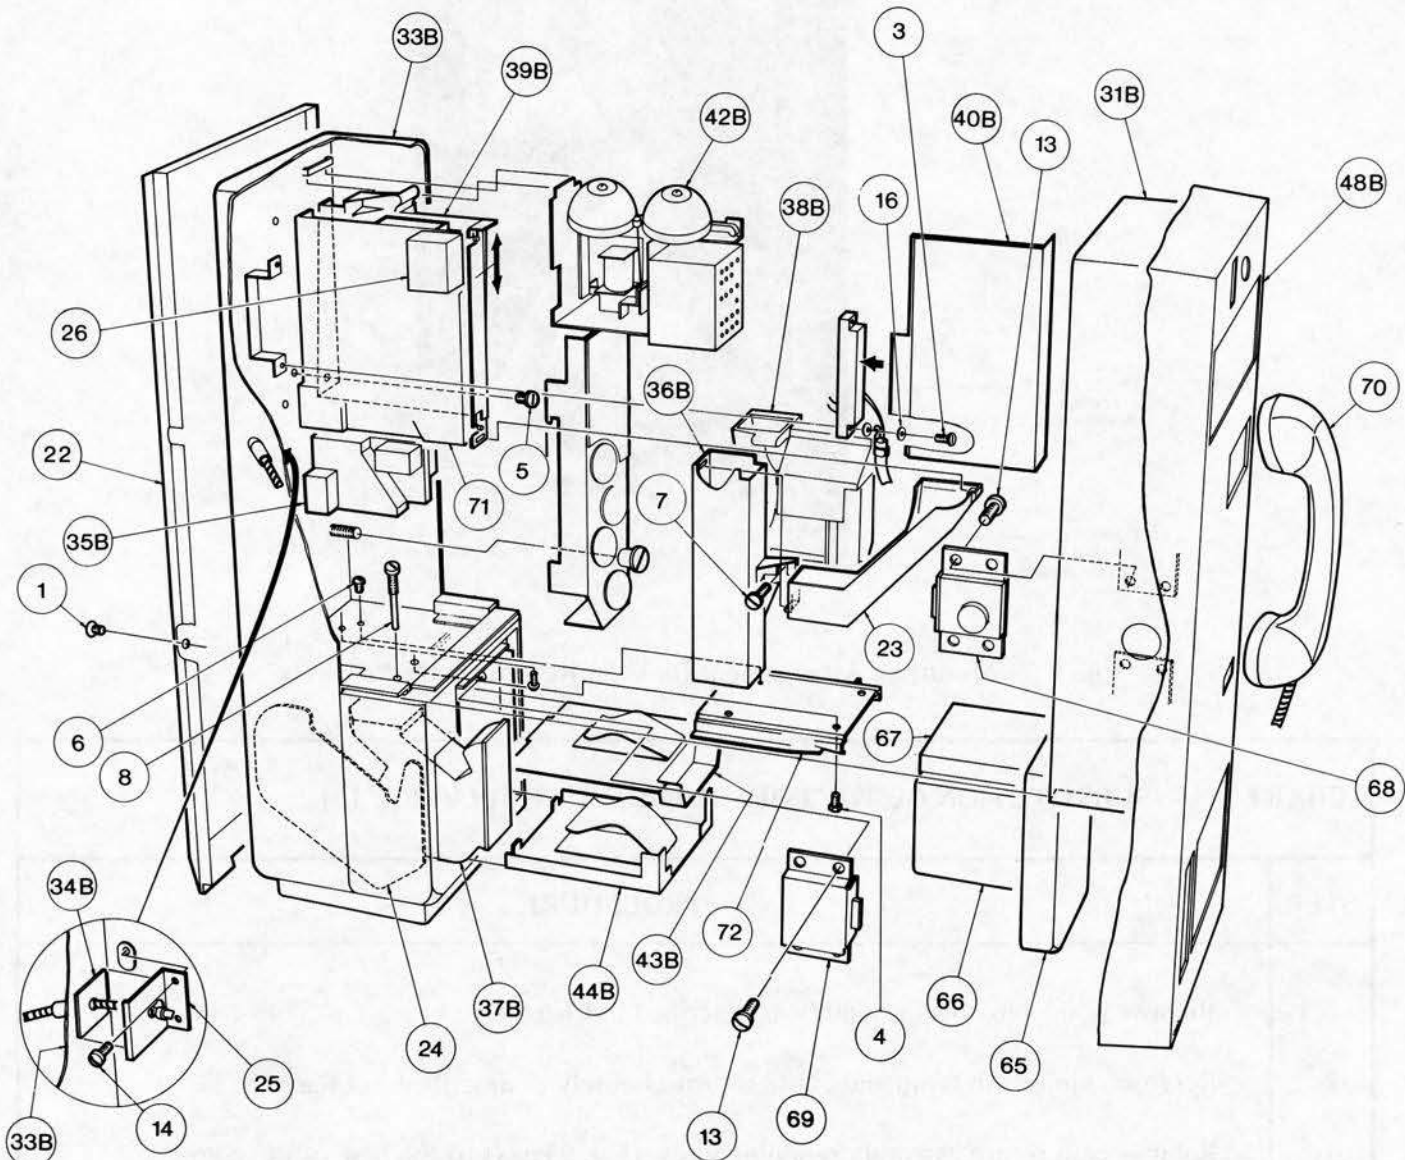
Exploded View of QSD400A1 and QSD2400A1 Coin Telephone Sets
